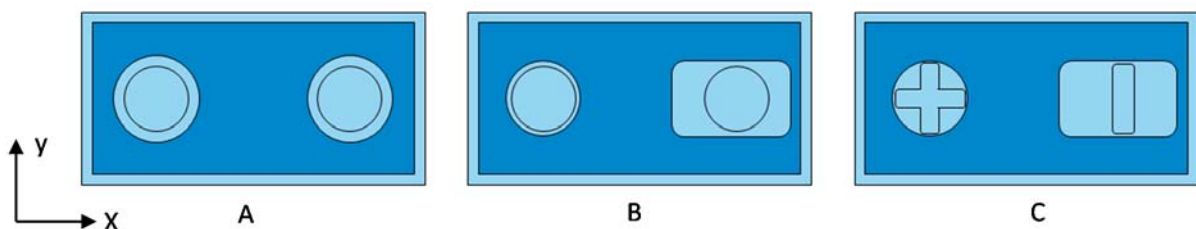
Interface between a component with two pins and a component with two holes. All 6 DOFs are to be constrained. In A) the design is ambiguous. In B) the design is improved. In C) the design has been further optimised for robustness, thereby reducing the variance of the holding force
